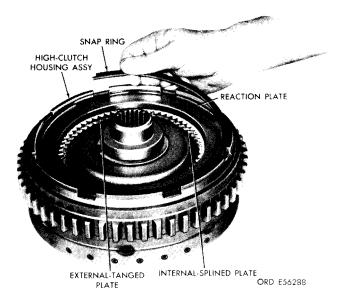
Removing or installing high-range clutch reaction plate snap ring.
